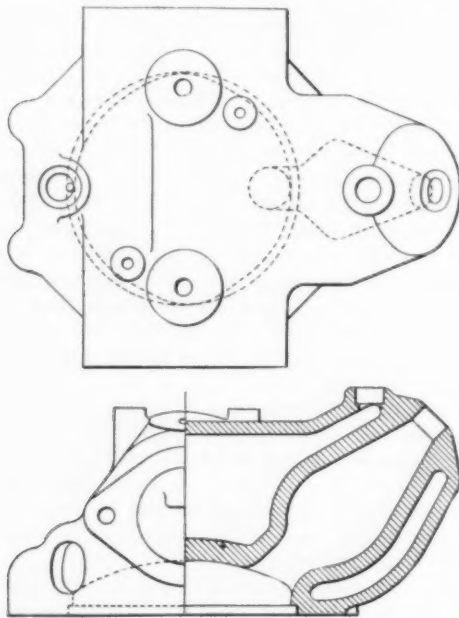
COMBUSTION-CHAMBER DESIGN No. 2
